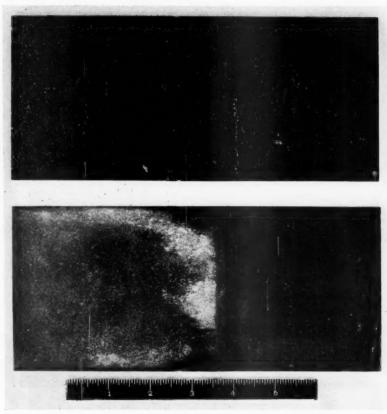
Top and Bottom Surfaces of Spot-Welded AZ31A Magnesium Specimen, 0.064 in. Thick, After Being Exposed to Industrial Atmospheric Conditions for a Six-Month Period.
